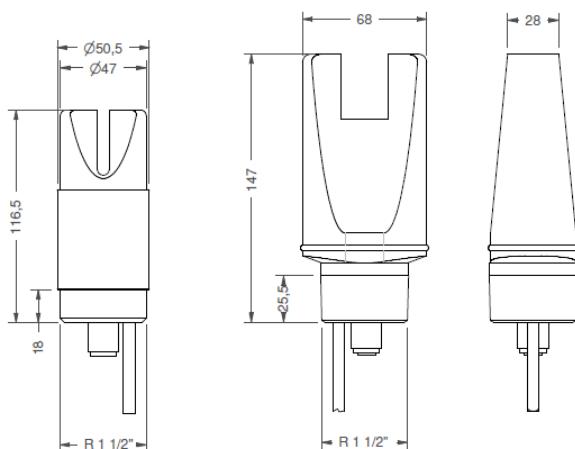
soli::lyser dimensions (dimensions in mm)
